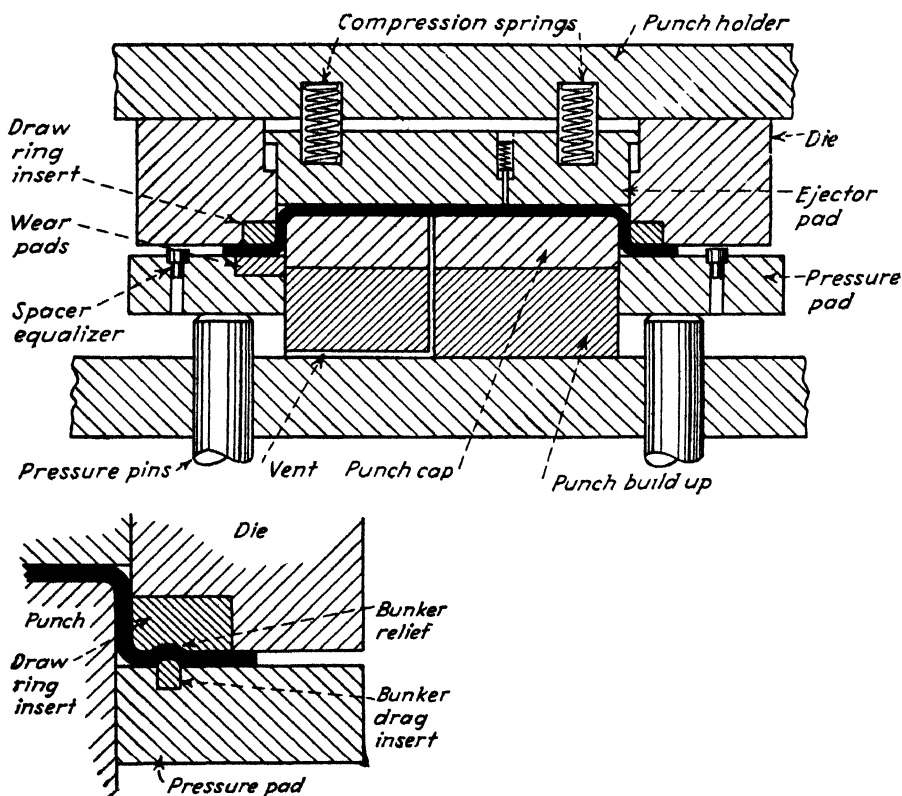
Shallow draw die for stainless steel. Lower enlarged section shows bunker-drag insert where more drag is needed between draw ring and pressure pad to eliminate wrinkling.
